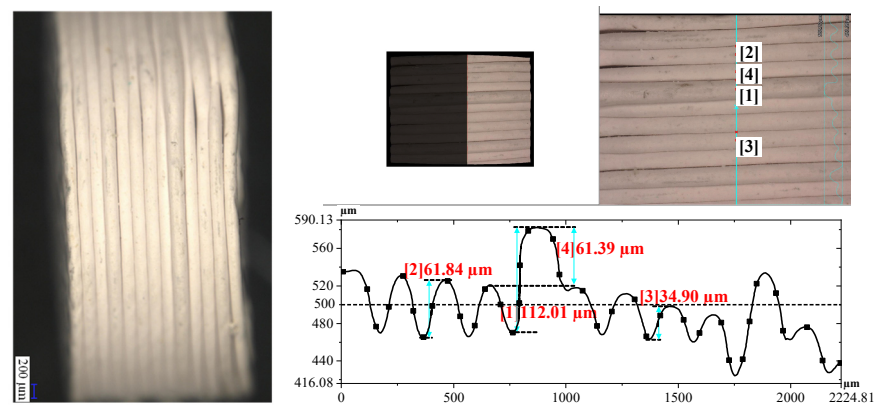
3D side view and 2D cut surface profile of the FDM-printed DRA.
